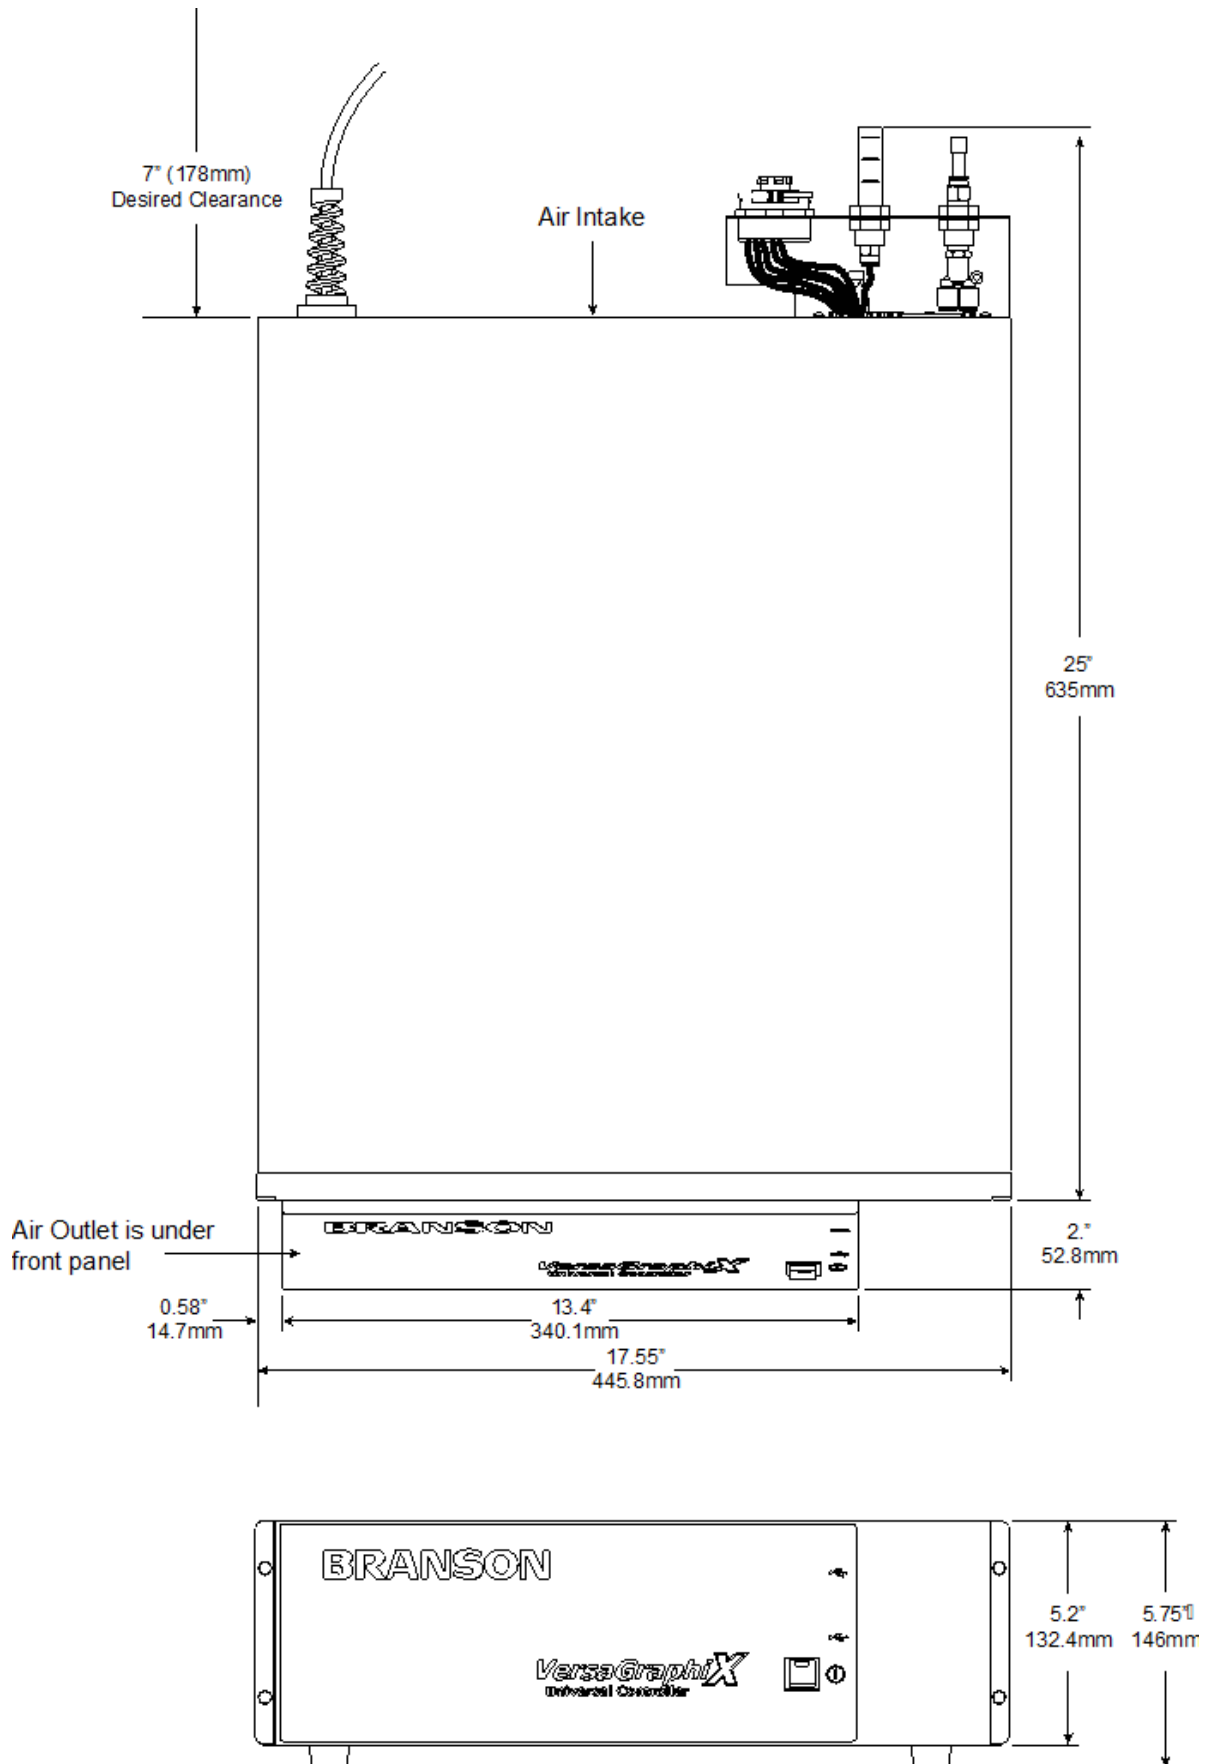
Controller Dimensional Drawing (Touch Screen)
